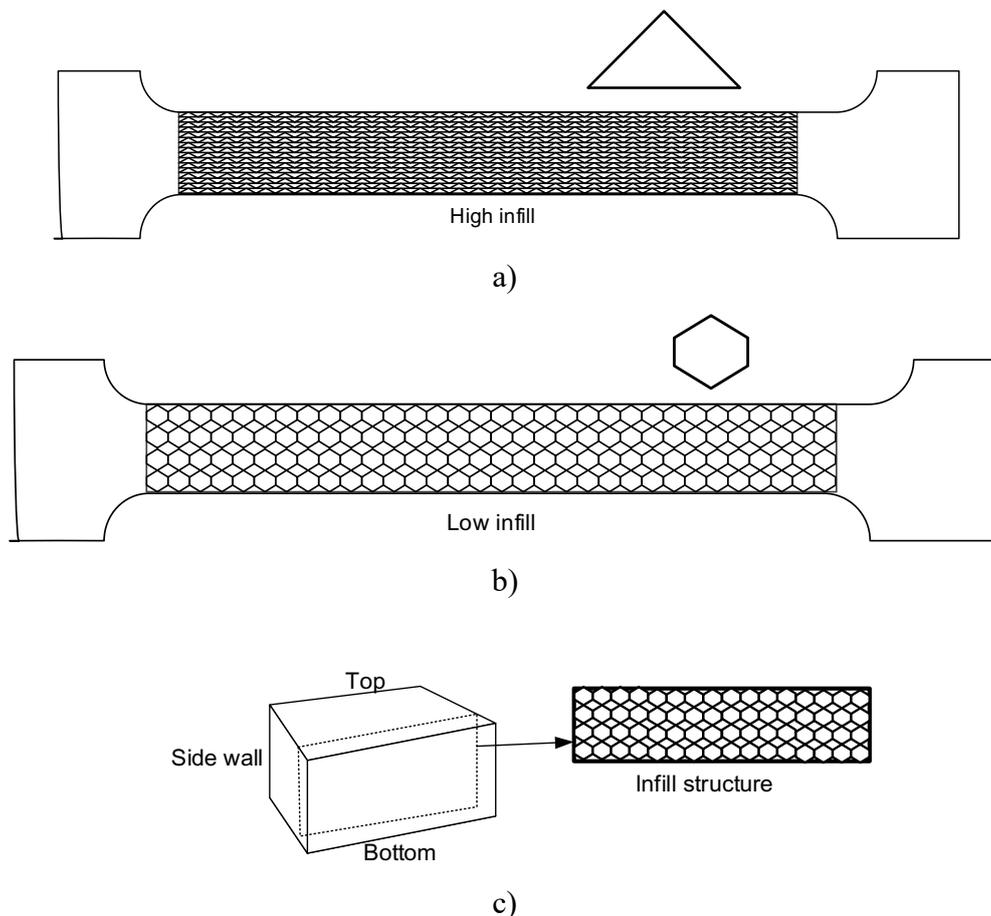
Schematic showing a) high infill structure, b) low infill structure and c) approach of bonded metal deposition (BMD) an extrusion-based additive manufacturing
